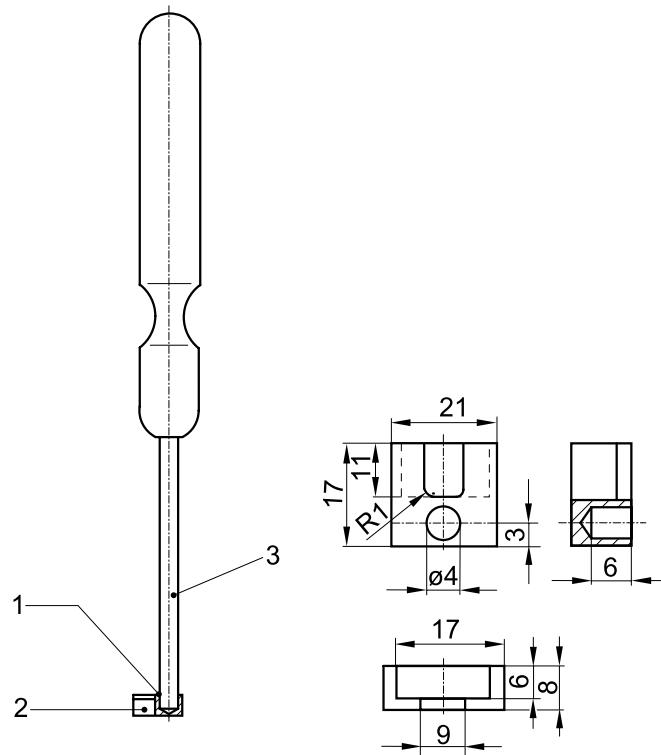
Tool for Inserting the Cable Plugs at the Solenoid Coils
